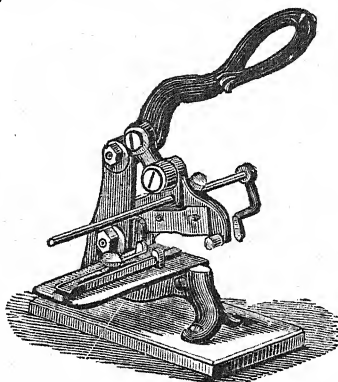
CUTTING MACHINE FOR LEADS AND BRASS.
